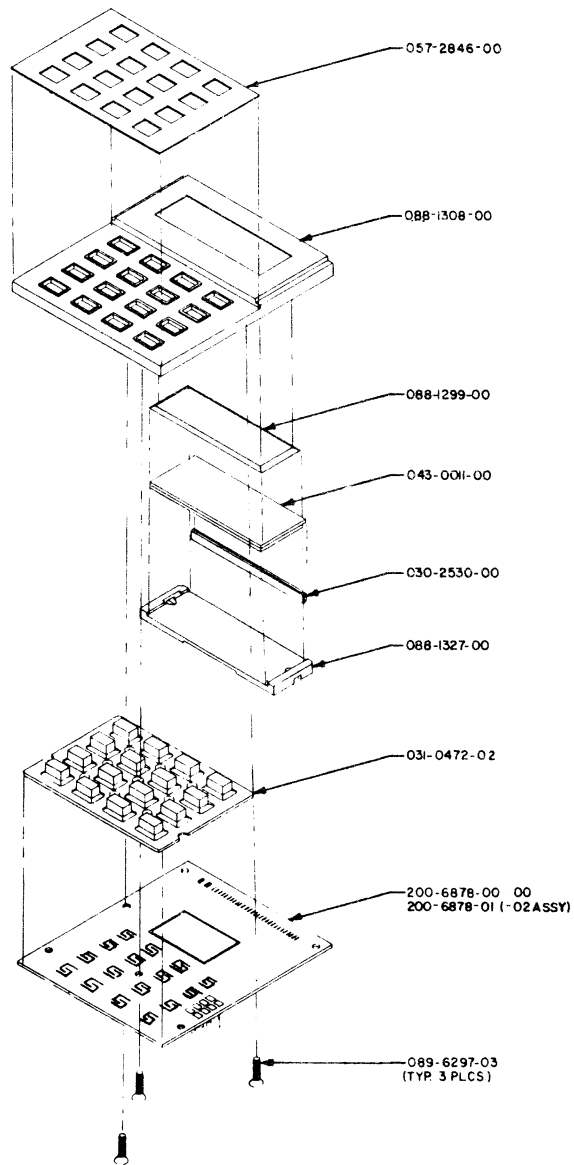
KEYBOARD/DISPLAY ASSEMBLY
